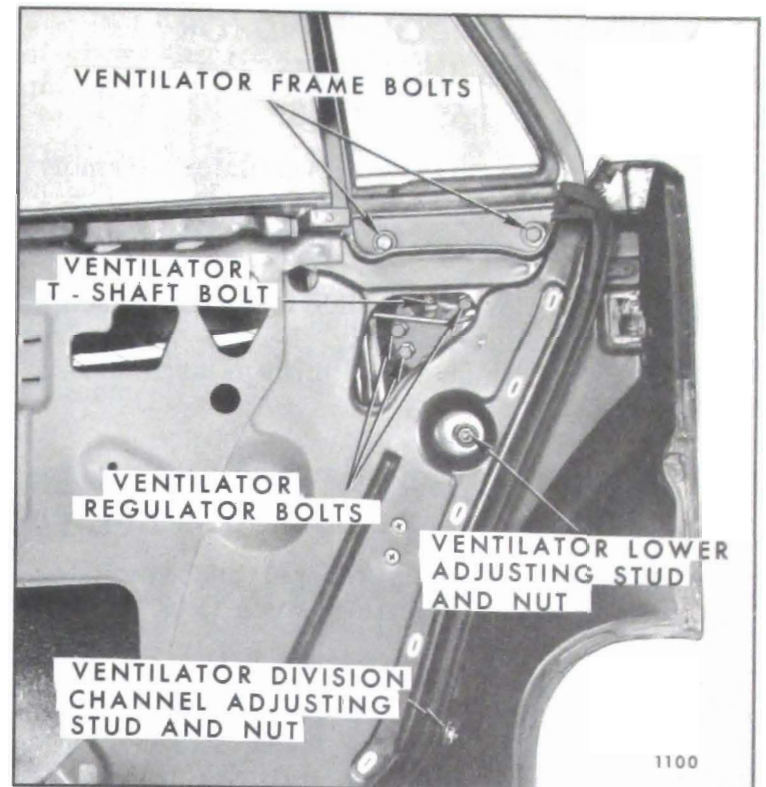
Rear Door Ventilator Attachments - 68069-68169 Styles
